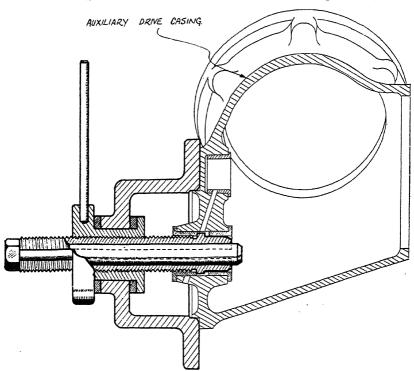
Tool for inserting or extracting gun gear shaft rear end bushes in auxiliary drive casing.
